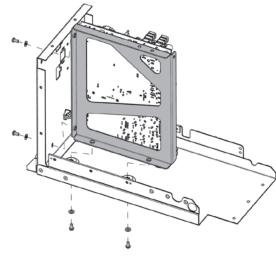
Fluidics Controller PCB/Bracket Assembly
